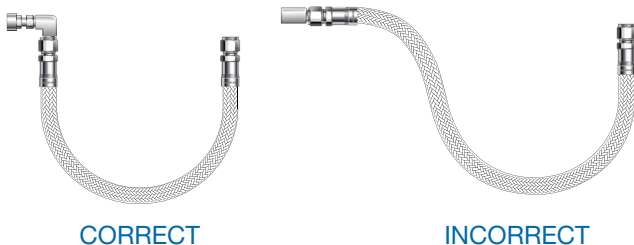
Avoid allowing a hose to hang vertically from a horizontal end connection. Instead, install a 90° elbow fitting.
